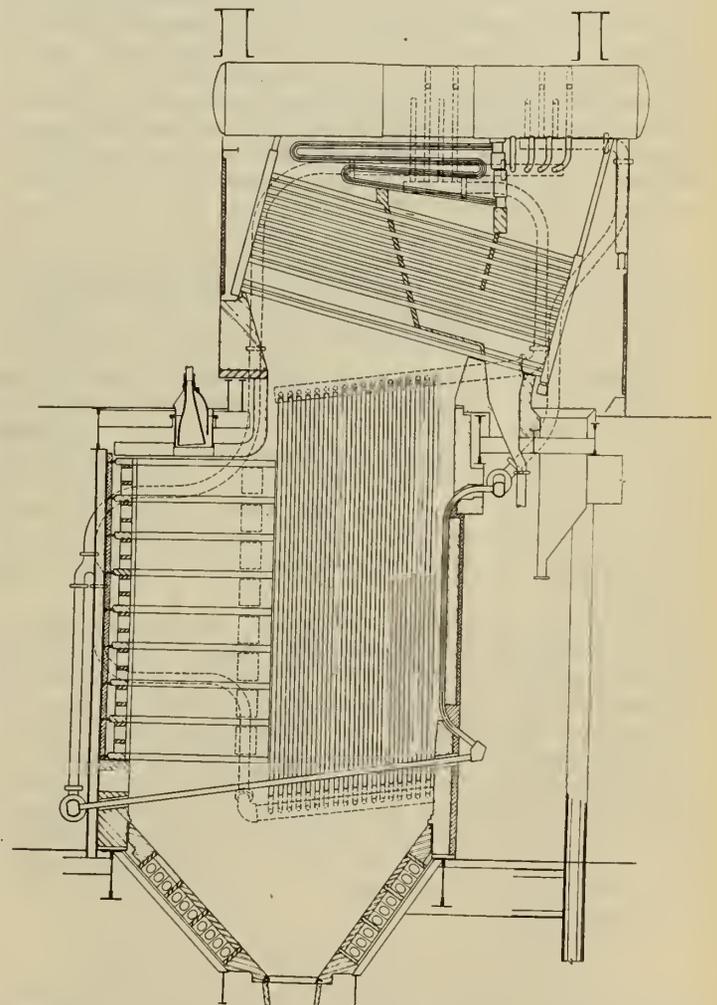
Cross-section of Boiler and Powdered Coal Furnace for a Canadian Paper Company.
